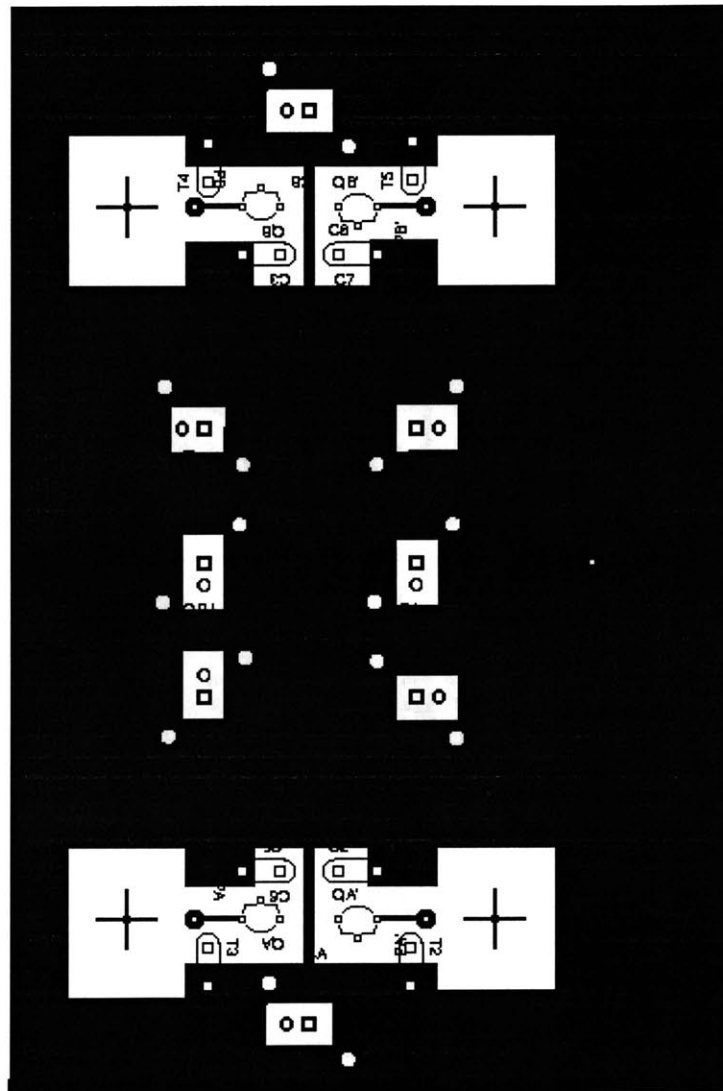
Schematic for the printed circuit board of the pulse shaper.
